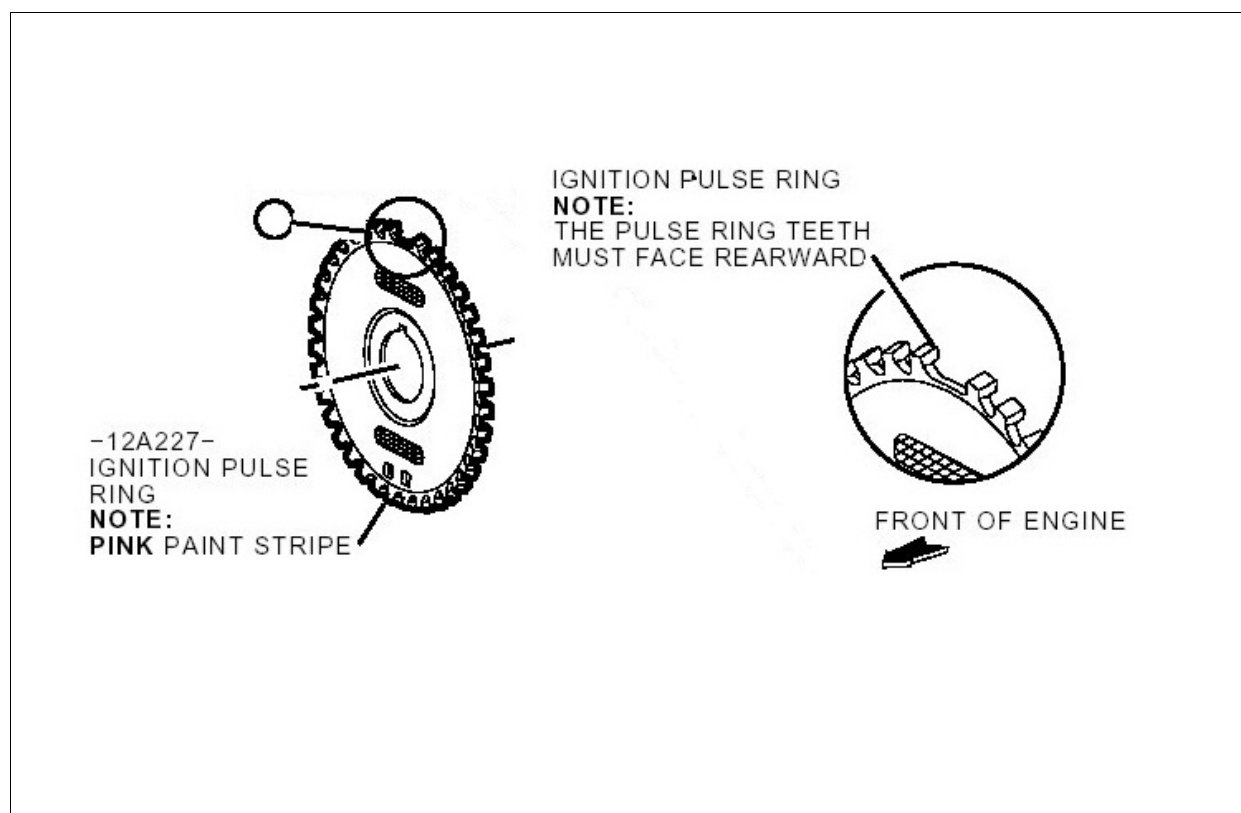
AJ60 Ignition Pulse Ring — Teeth Face Rearward
